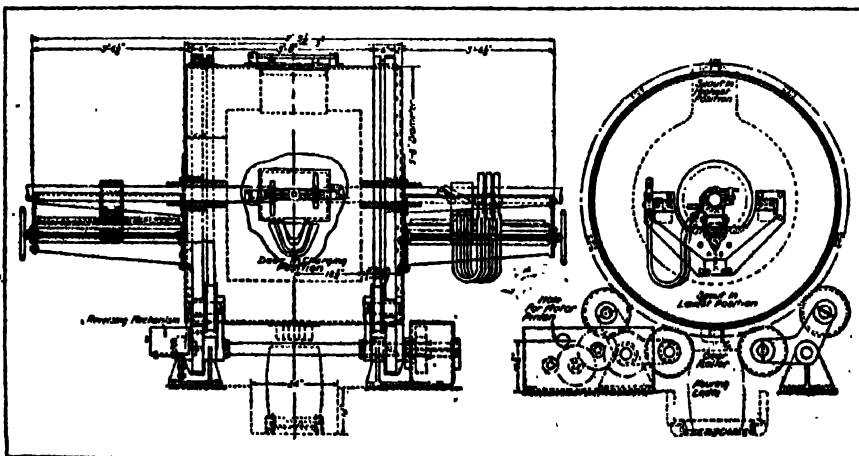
DETAILS OF THE BOOTH ELECTRIC ROTATING BRASS FURNACE
